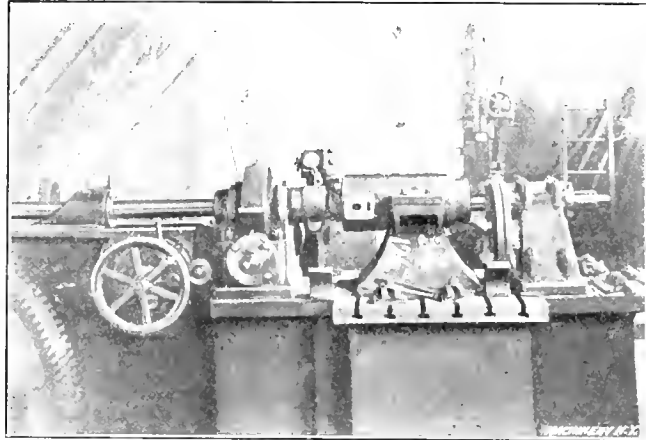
Rough Boring a Cylinder on a Horizontal Machine
